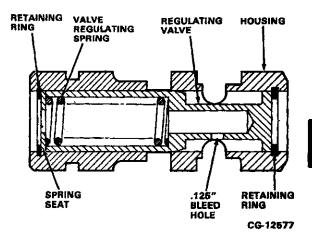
Prior Oil Pressure Regulating Valve Assembly
